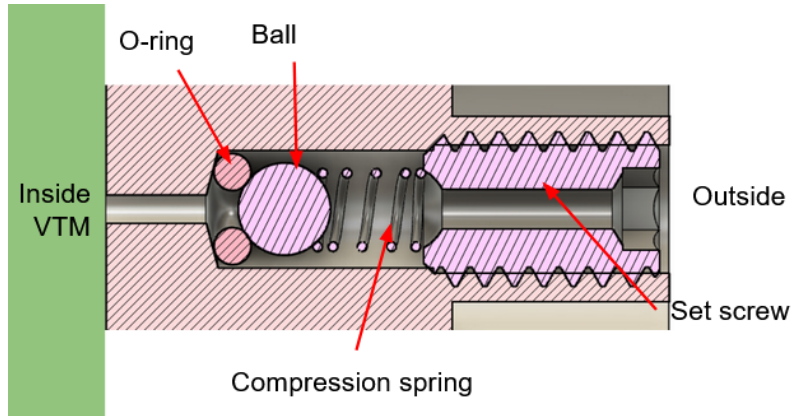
The Thermo Fisher check valve consists of a ball that is pressed onto an O-ring by a compression spring to allow air flow, when the outside pressure is lower than the inside pressure, and if not, creates a seal.
